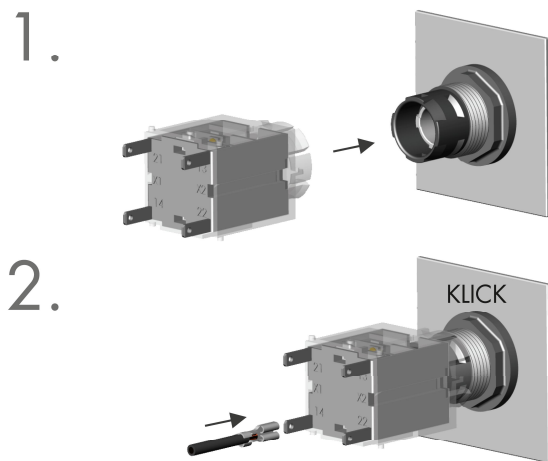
connection AT.../ AZ.../ BT... / BZ....
